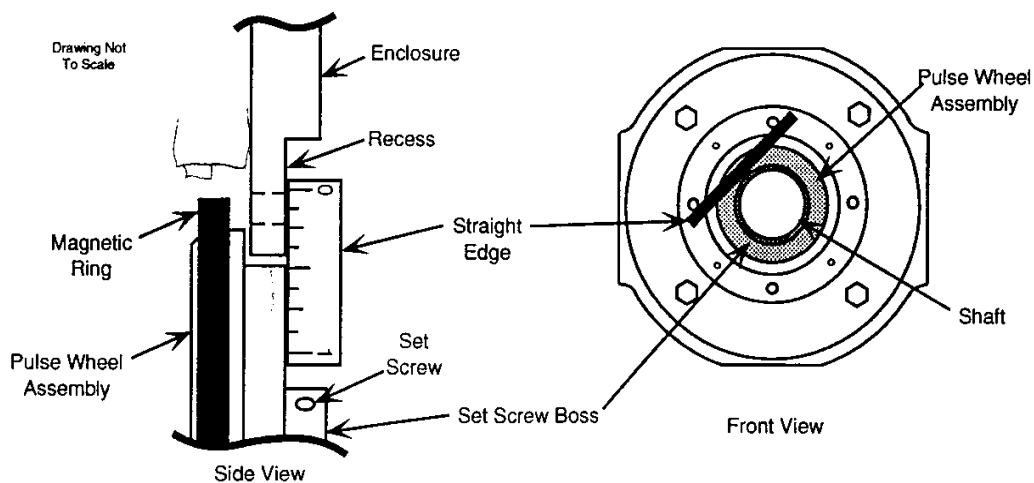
Pulse Wheel Alignment Check Using Straight Edge
